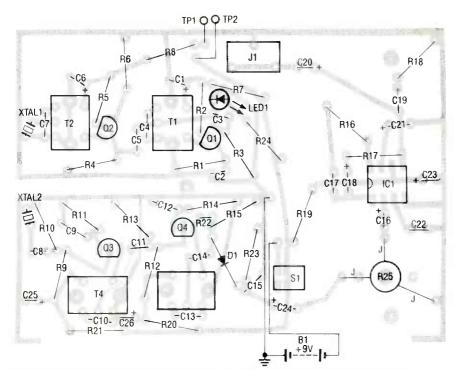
PARTS PLACEMENT. Mount and solder all components as shown here.
